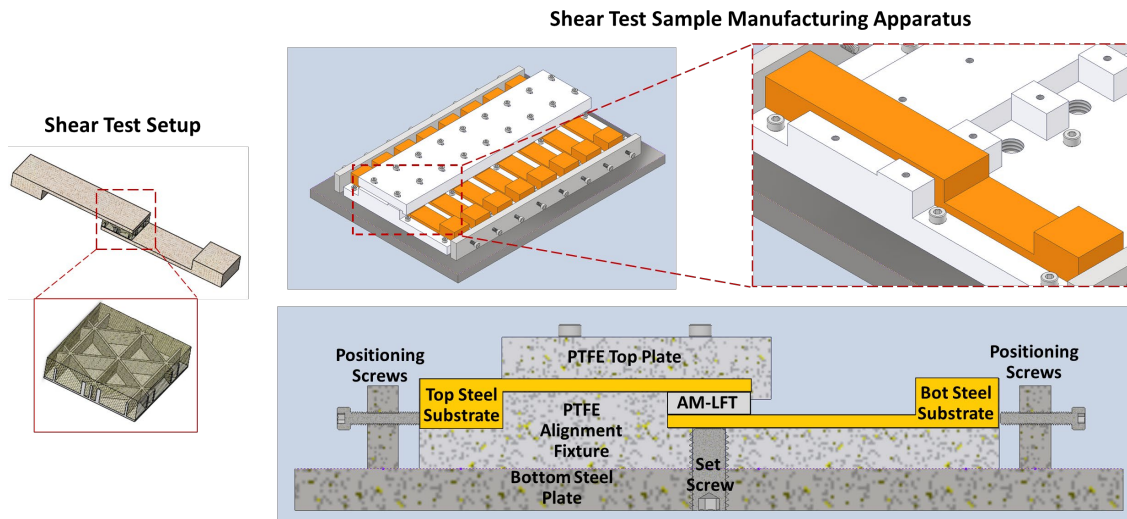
Experimental shear test setup and the apparatus of manufacturing shear test samples. Source: ORNL.
